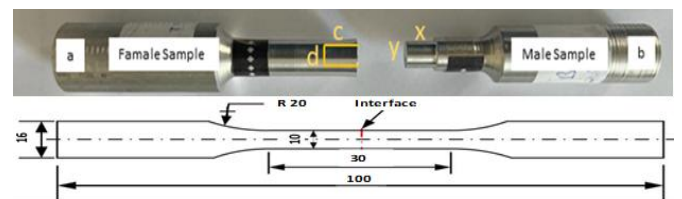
Schematic representation of weld specimen configuration and MLM clamp parameters, illustrating the critical geometric dimensions (c, d, x, y) governing the mechanical locking mechanism.
